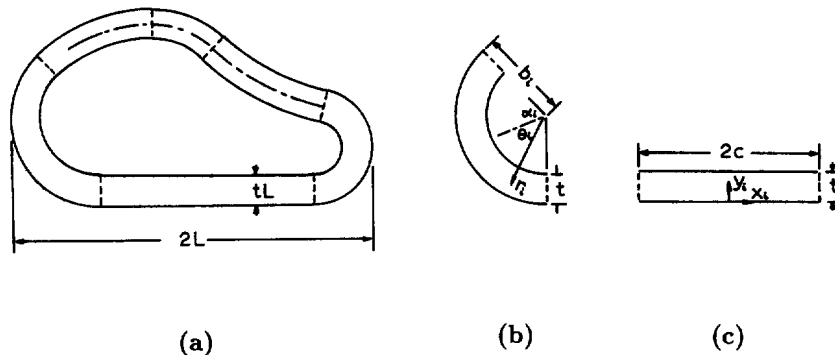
(a) Cross-section of the hollow tube; (b) an annular piece; (c) a rectangular piece.
